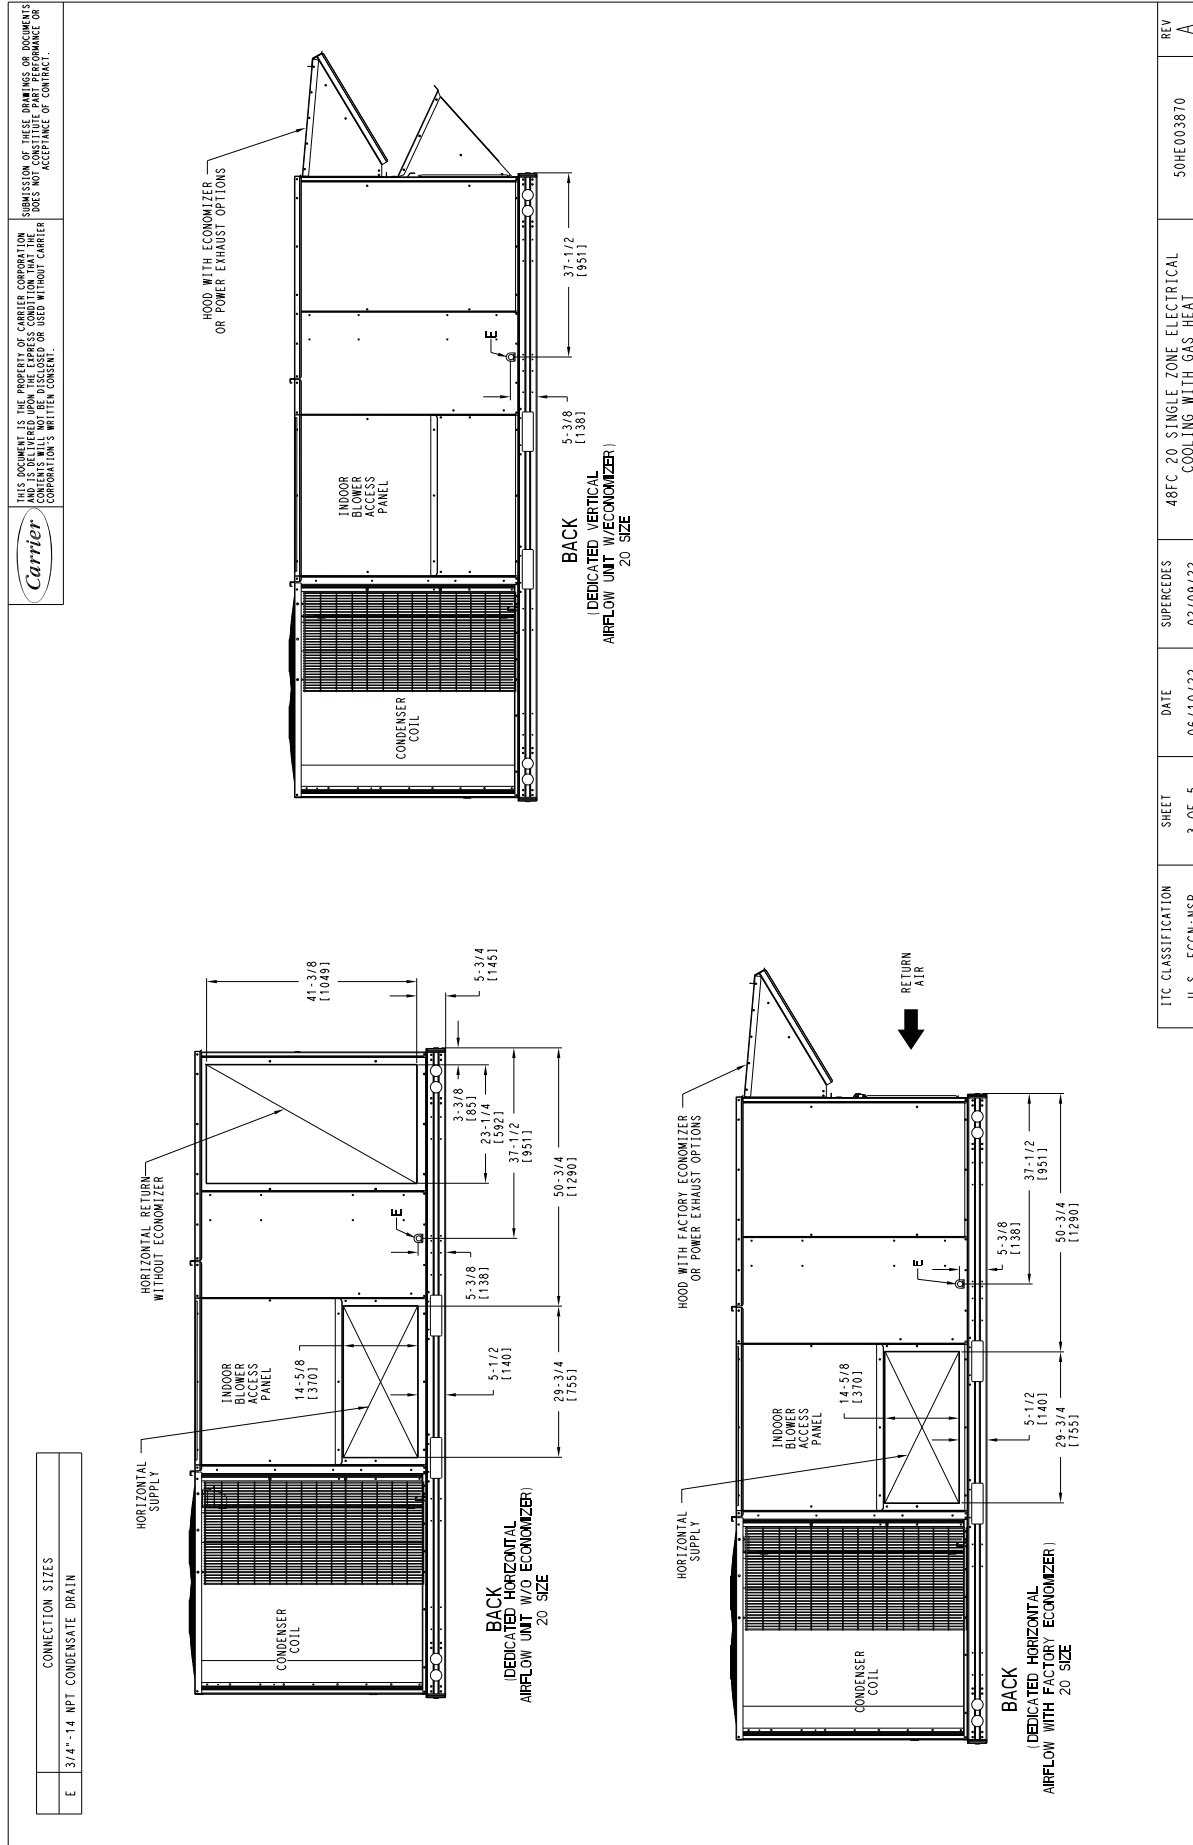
48FC20 Base Unit Dimensions (cont)
